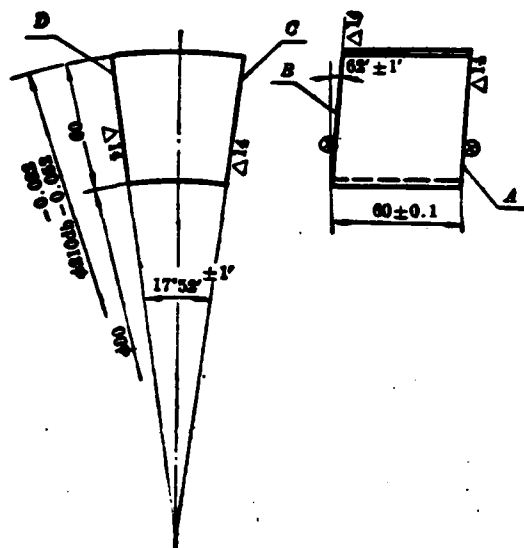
Mirror plate of umbrella-shaped scan mirror:
